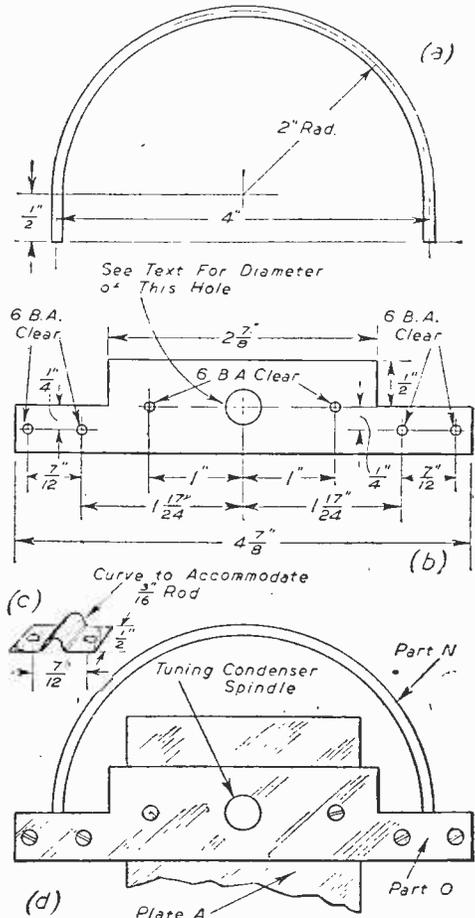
(a), (b) and (c).—Warning light mechanism, and parts N and O. (d) Appearance of semi-circular contact mounting when assembled. The brass saddles holding parts N and O together are mounted behind part O.
